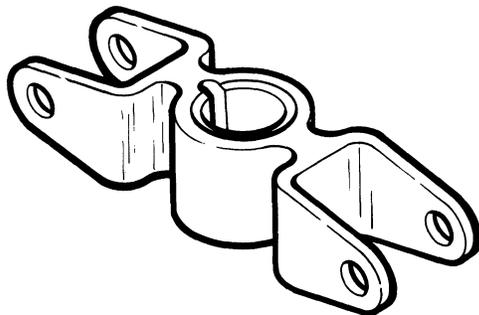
Tail Rotor Hub and Blade Assembly (206-011-810)
